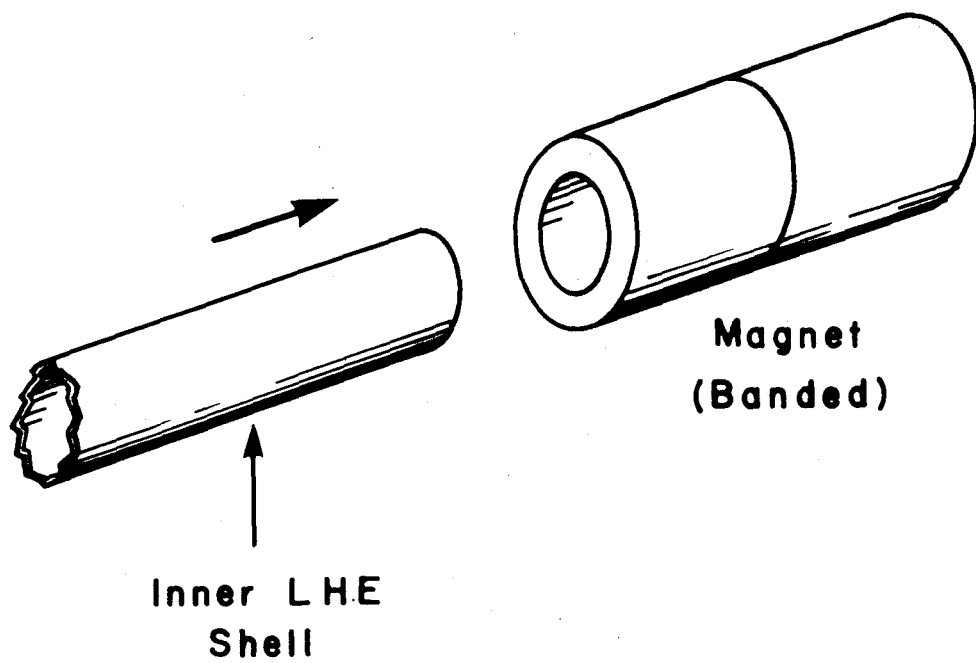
Banded Magnet Assembly with Inner Liquid Helium Shell
